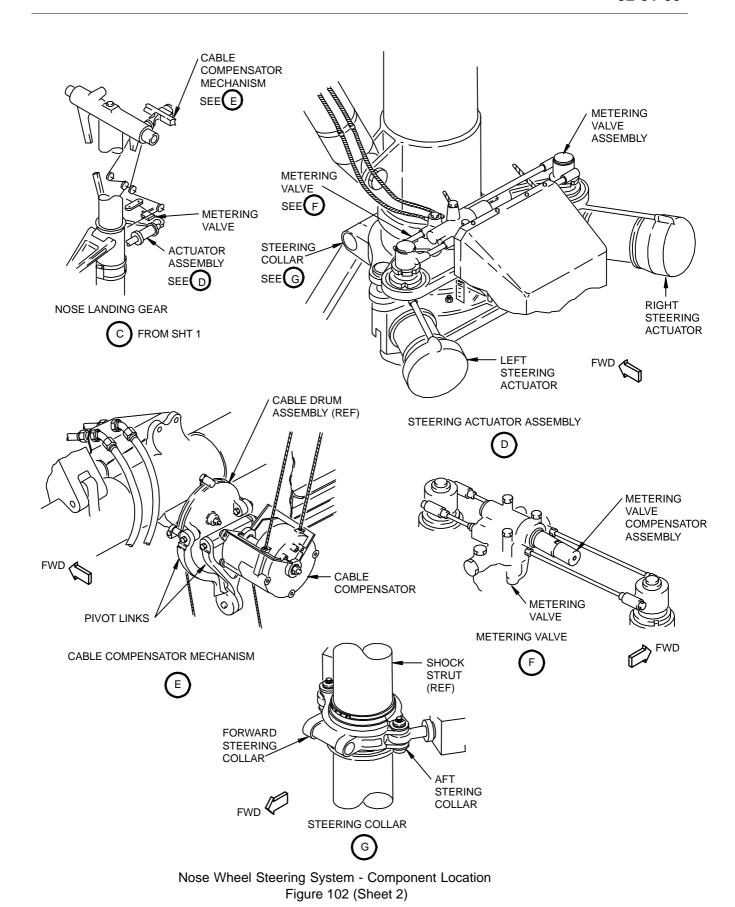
32-51 Nose Wheel Steering Sys. Comp. Location Fig. 102 (Sheet 2)
